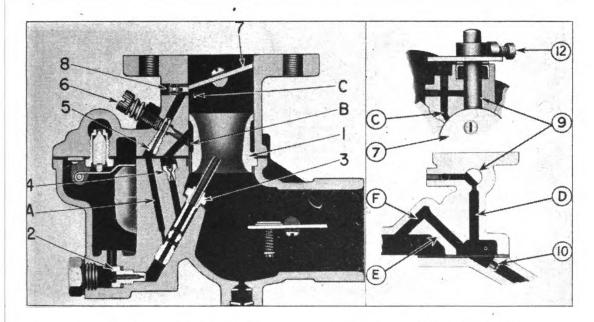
Sectional View of Zenith Carburetor Used on "SI" Tractor
